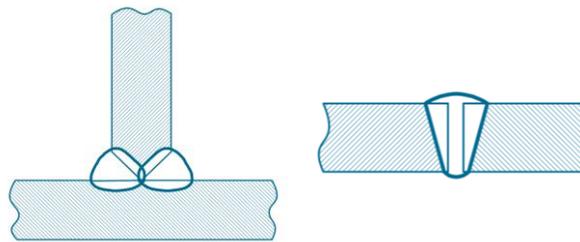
Welds examples (Concept draw, 2016)
